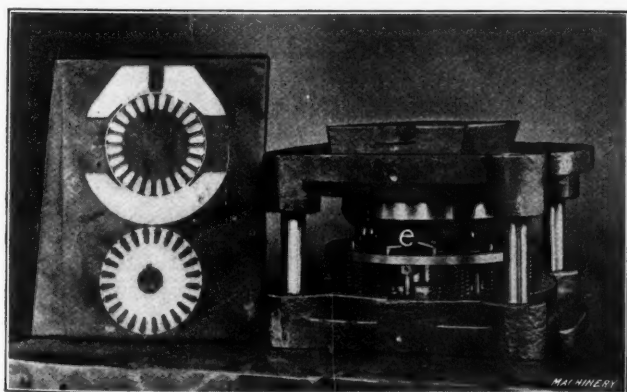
Assembled Punch and Die for blanking and notching Armature Disks
